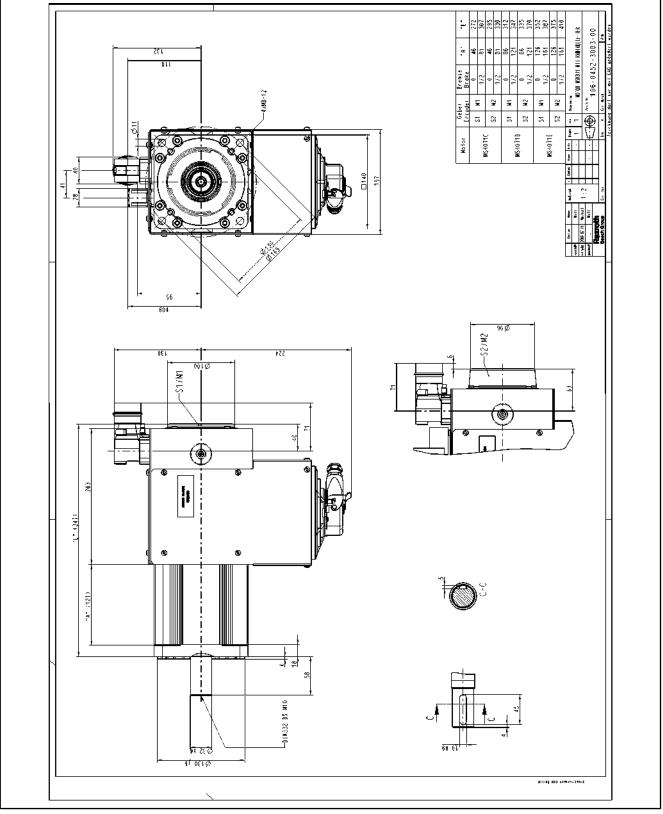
Dimension sheet MSK071 with radial fan unit
